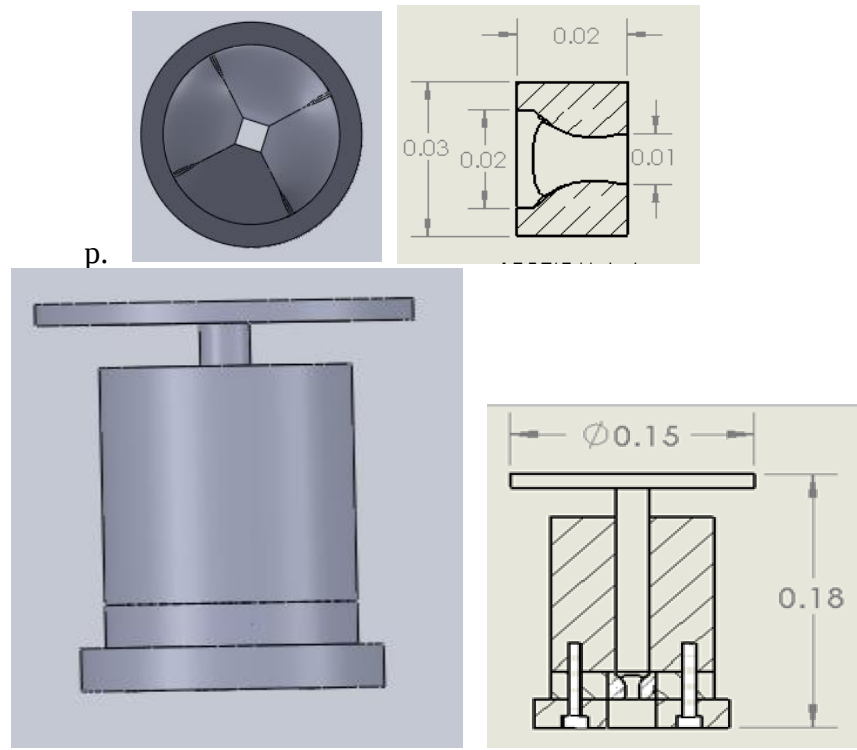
19 90% area reduction 3rd order polynomial dies 3D,2D and assembly drawing
